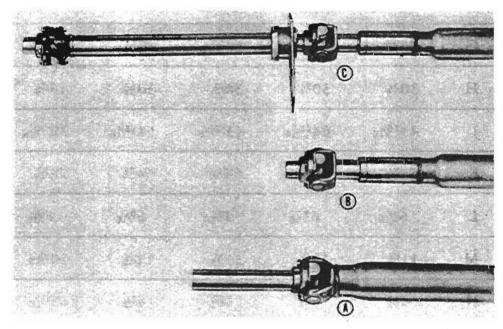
Showing the Three Basic Types of Universal Joint and Propeller Shaft Assemblies.
